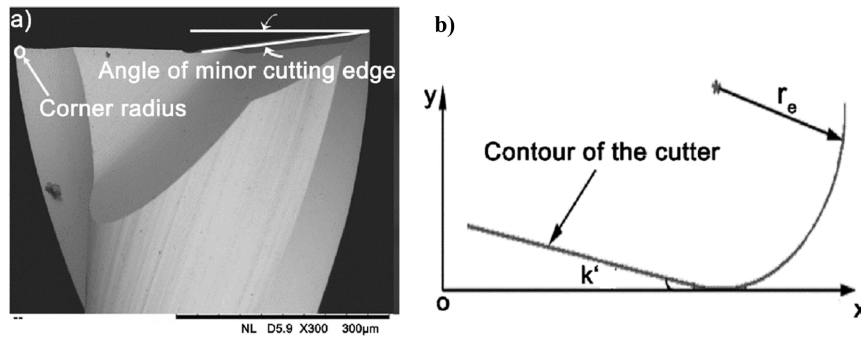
Tool geometry. a) side view; b) end cutting edge profile.
